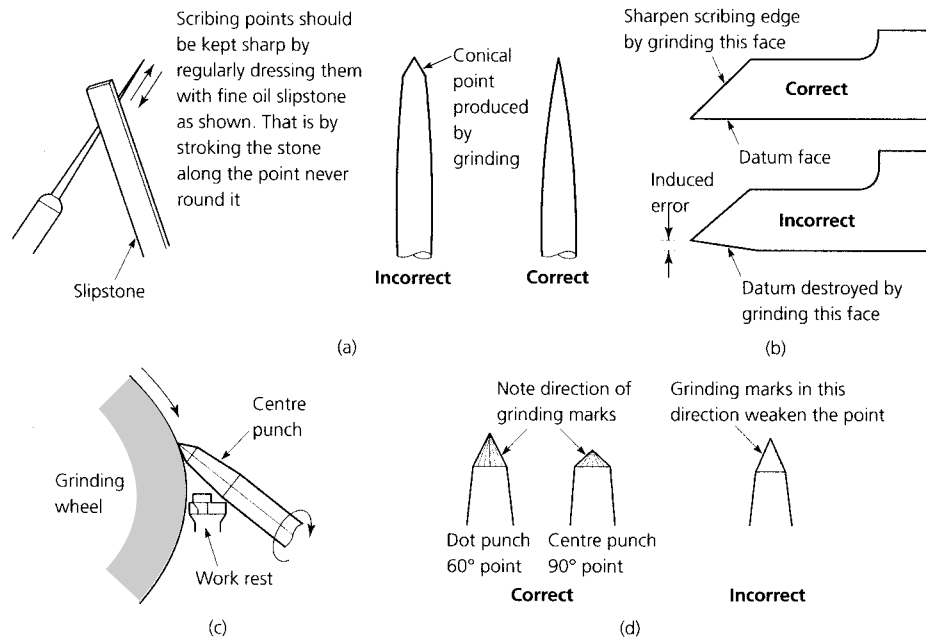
Care of marking-out equipment: (a) sharpening scriber points; (b) sharpening height gauge scribing blades; (c) sharpening centre and dot punches; (d) correct dot and centre punch point configurations
